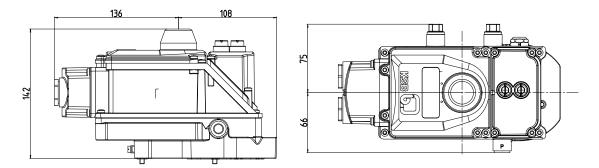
SMARTRONIC U AS-i / type A1313 dimensions
